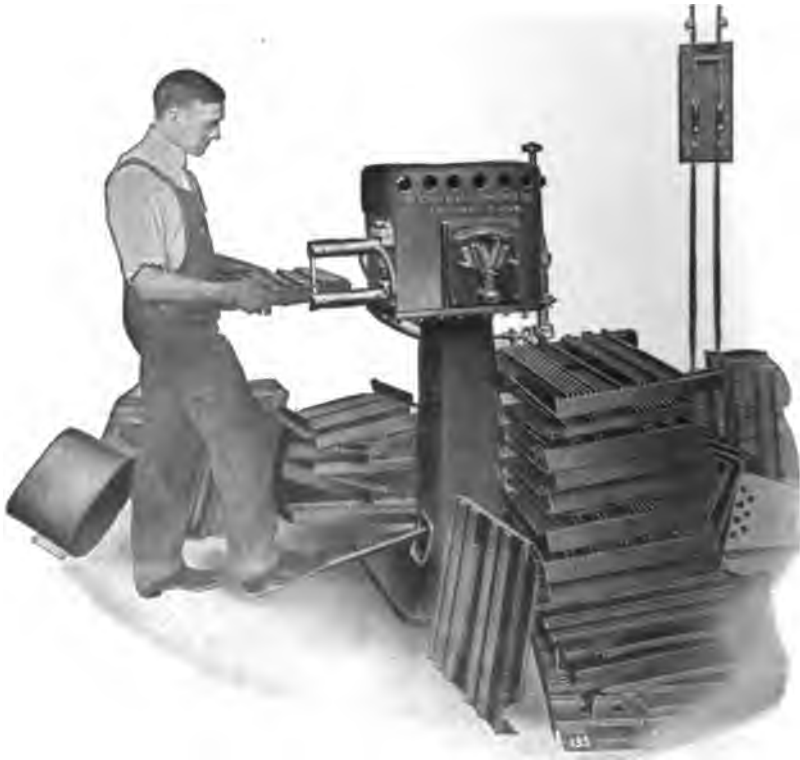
Spot Welder for Pressed Metal Frames
